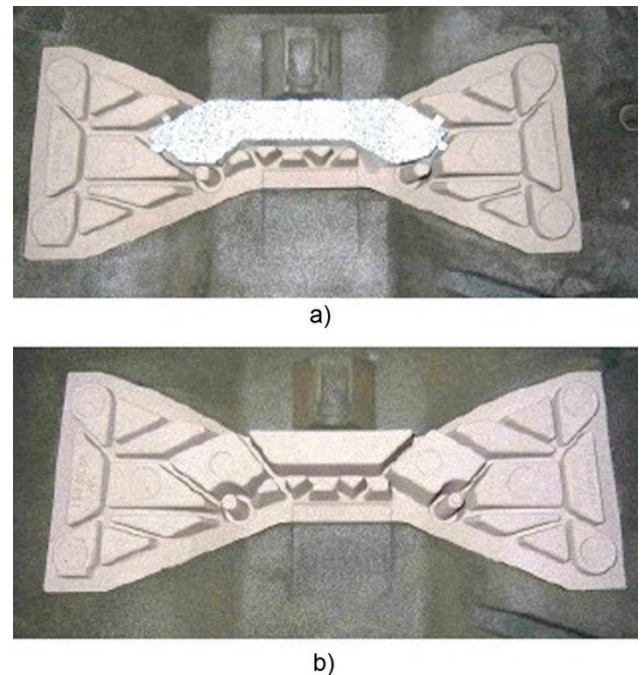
Comparison of two different molds: a) casting mold with a permanent foam core AlMgSi7; b) casting mold with rib reinforcements on the casting product [14]
